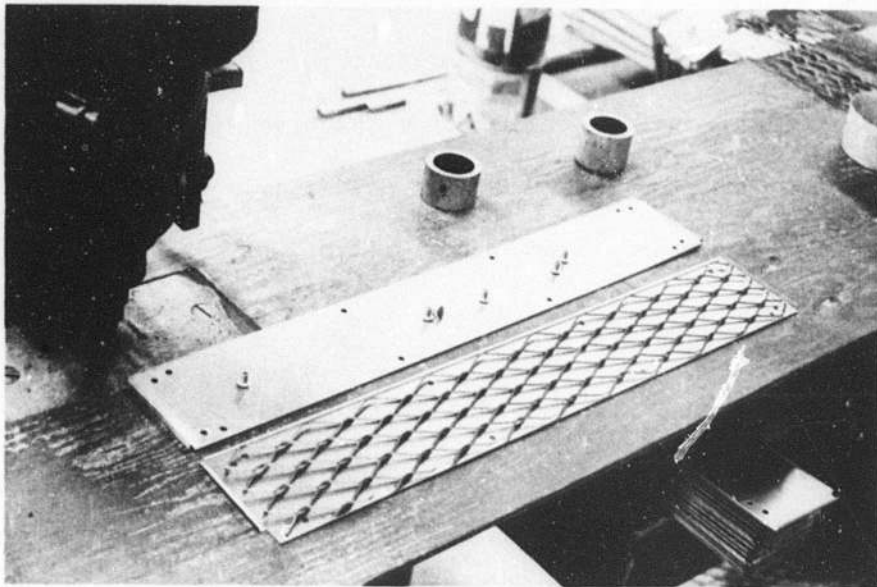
Model AM2 Landing Mat Parts Ready for Assembly.
